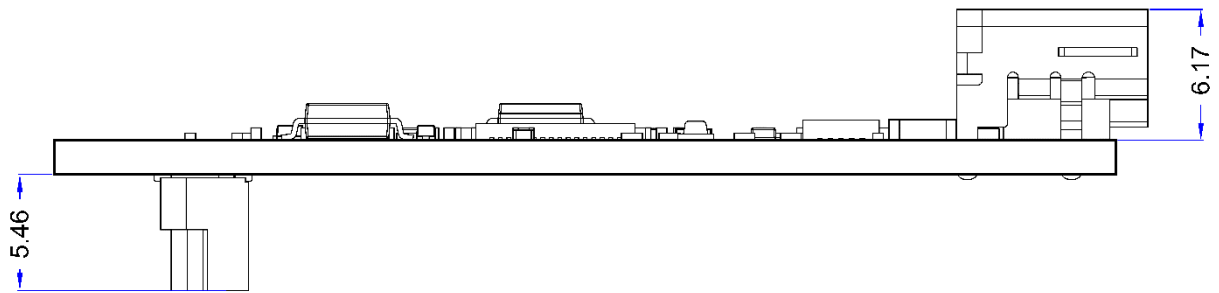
Verdin DSI to HDMI Adapter Dimensions in mm (side1, side 1 view).
